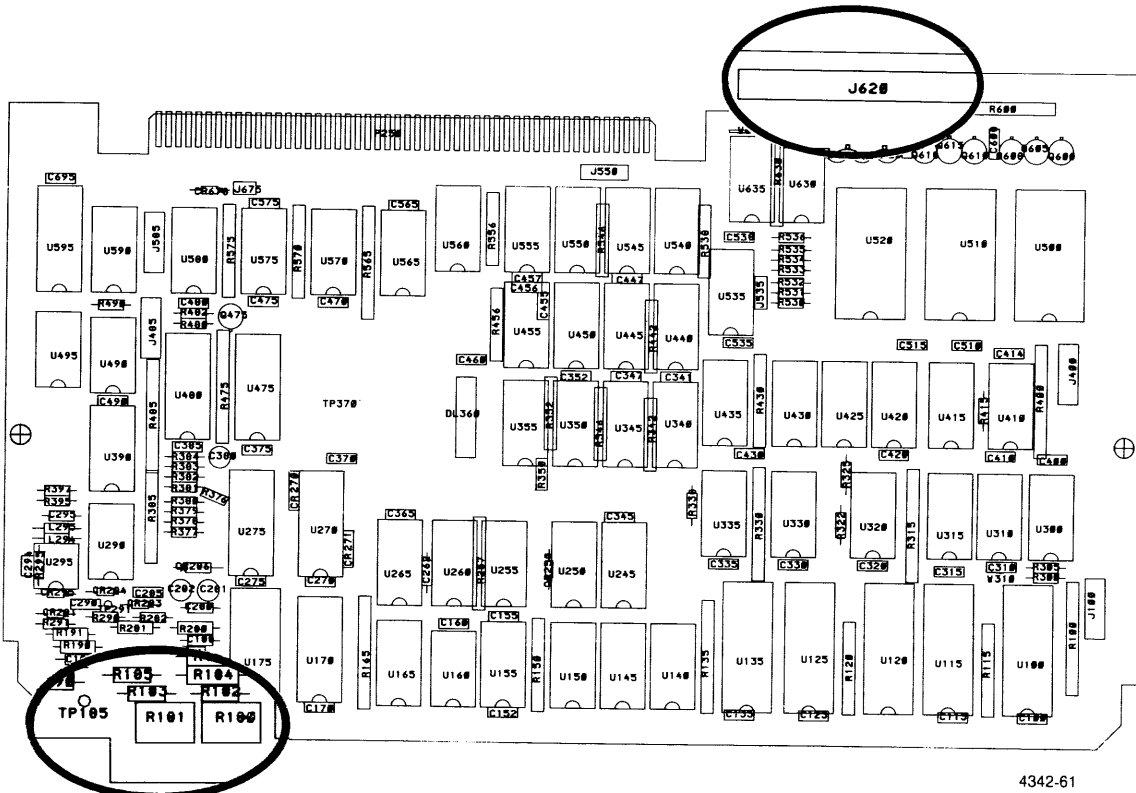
Expanded view of the 1240D1 9-Channel Acquisition Board shows components used in the Threshold Adjust.
